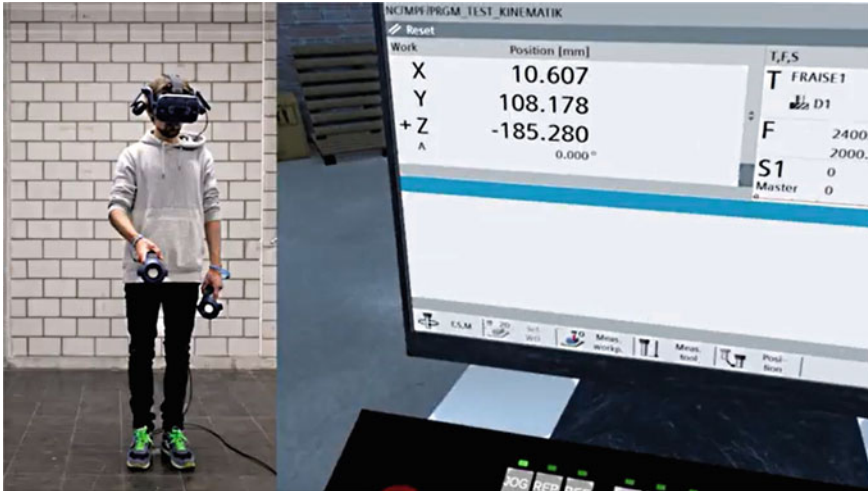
A machine operator accessing the machine's DT through VR (left) and a VR view of the virtualized Human-Machine Interface (HMI) (right)
